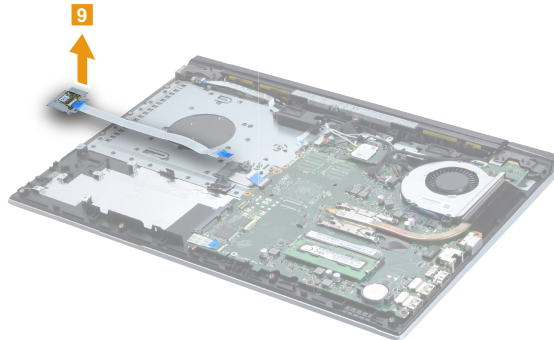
Removal steps of USB Board and fingerprint reader module (continued)
